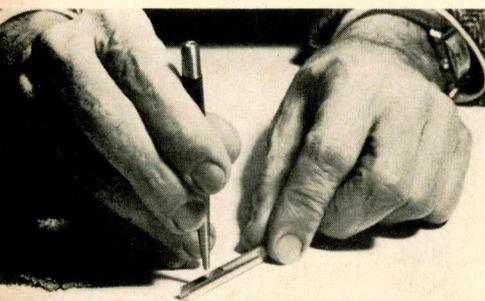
More about dimple, center punch outer shaft, will provide the necessary drag for friction-clutch controls.
